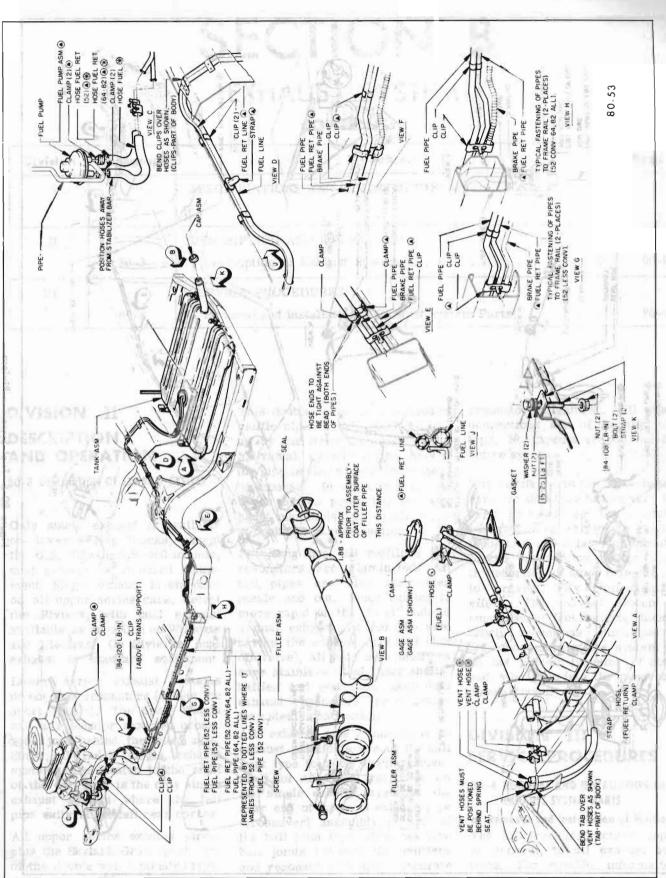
Fuel System - LeSabre, Wildcat & Electra
